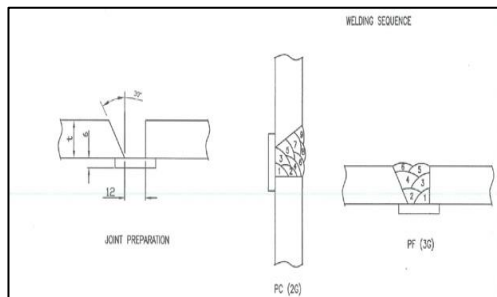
Welding Connection Scheme for 2G and 3G positions (Source: Ahmad Abi, et al. 2019)
